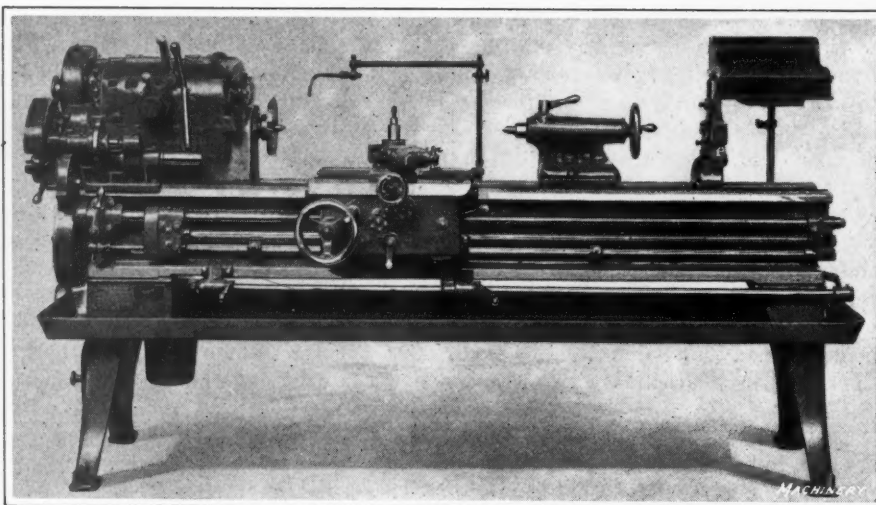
14-inch by 8-foot Geared-head Lathe built by the Springfield Machine Tool Co.
